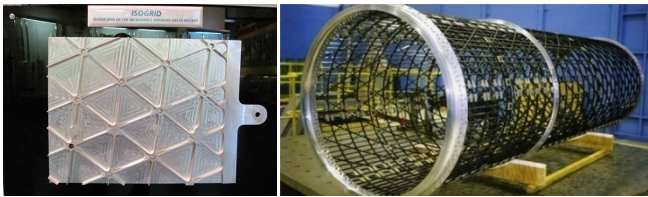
(left) isogrid stiffening detail; (right) cylindrical anisogrid stiffening structure
